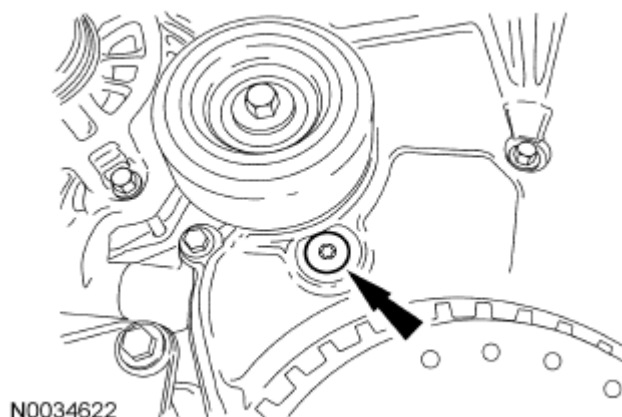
Locating Lower Front Cover Timing Hole Plug
